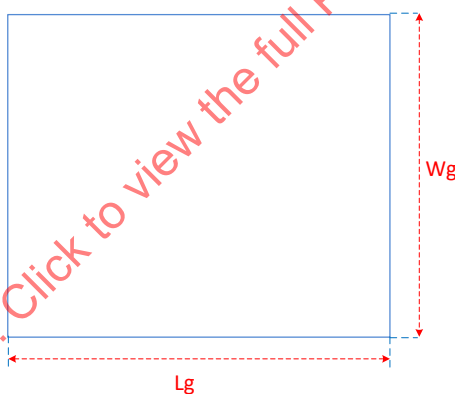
Definition of the gauges for the holder cavity compliance test
